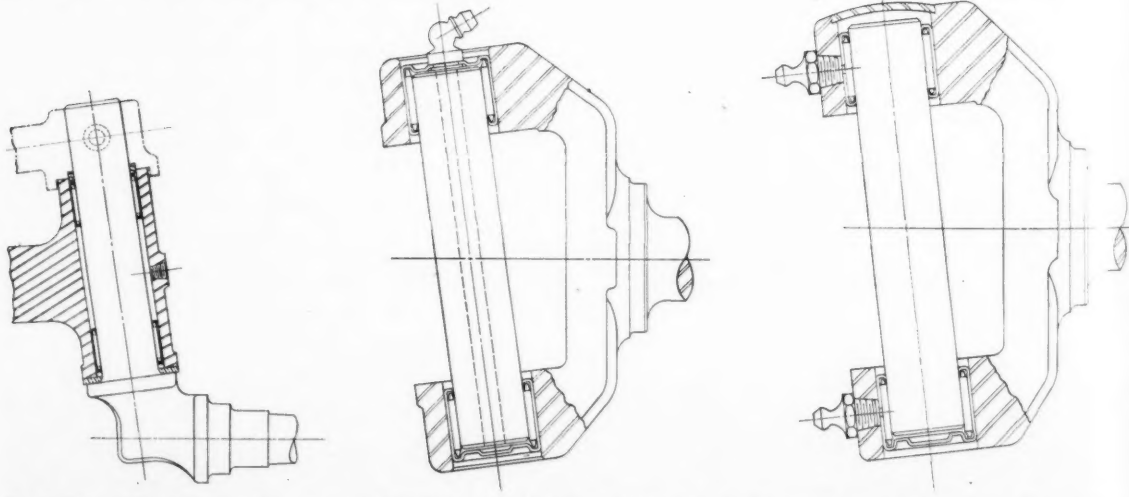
Three different types and arrangements of needle bearings in kingpin positions. Reduced operator fatigue and extended lubrication periods are two reasons for adoption of needle bearings in steering knuckles. Needle bearings solve kingpin problems imposed by heavy front-mounted attachments
